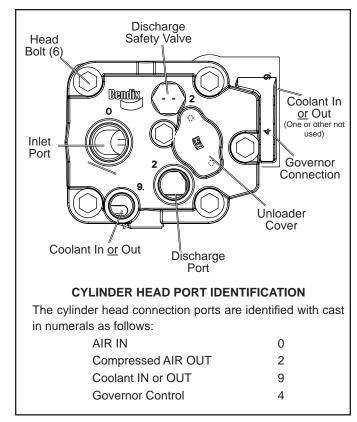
CLOSED ROOM BENDIX® BA-921® COMPRESSOR CYLINDER HEAD
